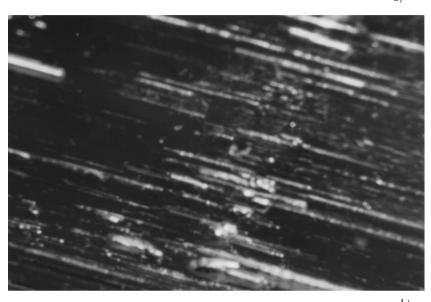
Exterior surface of the beads, with "bubbles", witness of the drawing process.
